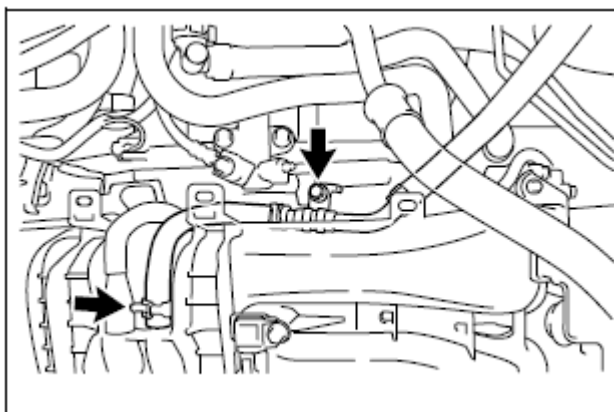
Identifying Vacuum Tube Connector Hose Clamp And Bolt
